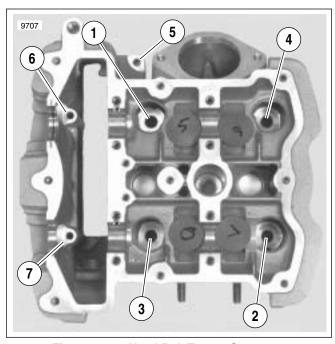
Head Bolt Torque Sequence (rear cylinder head)
